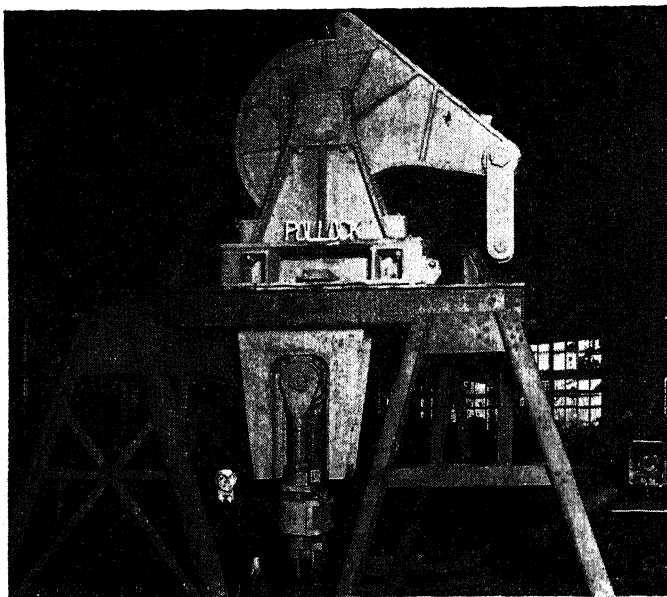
Welded steel provides a superior bell operating rigging. Note the interesting use of flange stiffeners.
